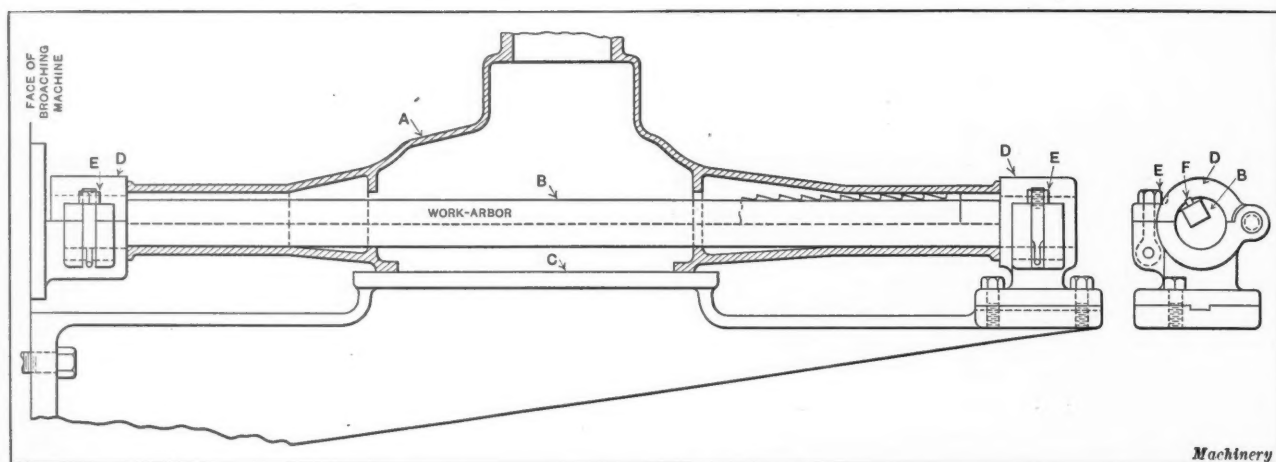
Reo Rear Axle Housing A is held by Arbor B on Fixture C while broaching a Keyway
